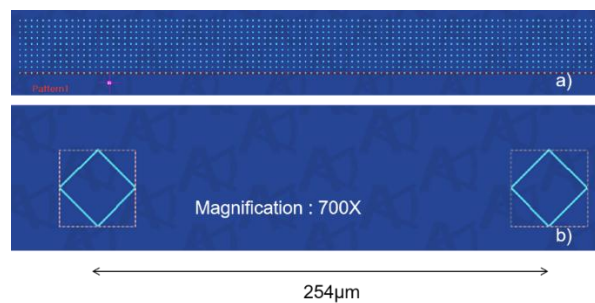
(a) Indentation pattern on the transverse cross-section of the weld; and (b) distance between two indent at 700 \times magnification.
